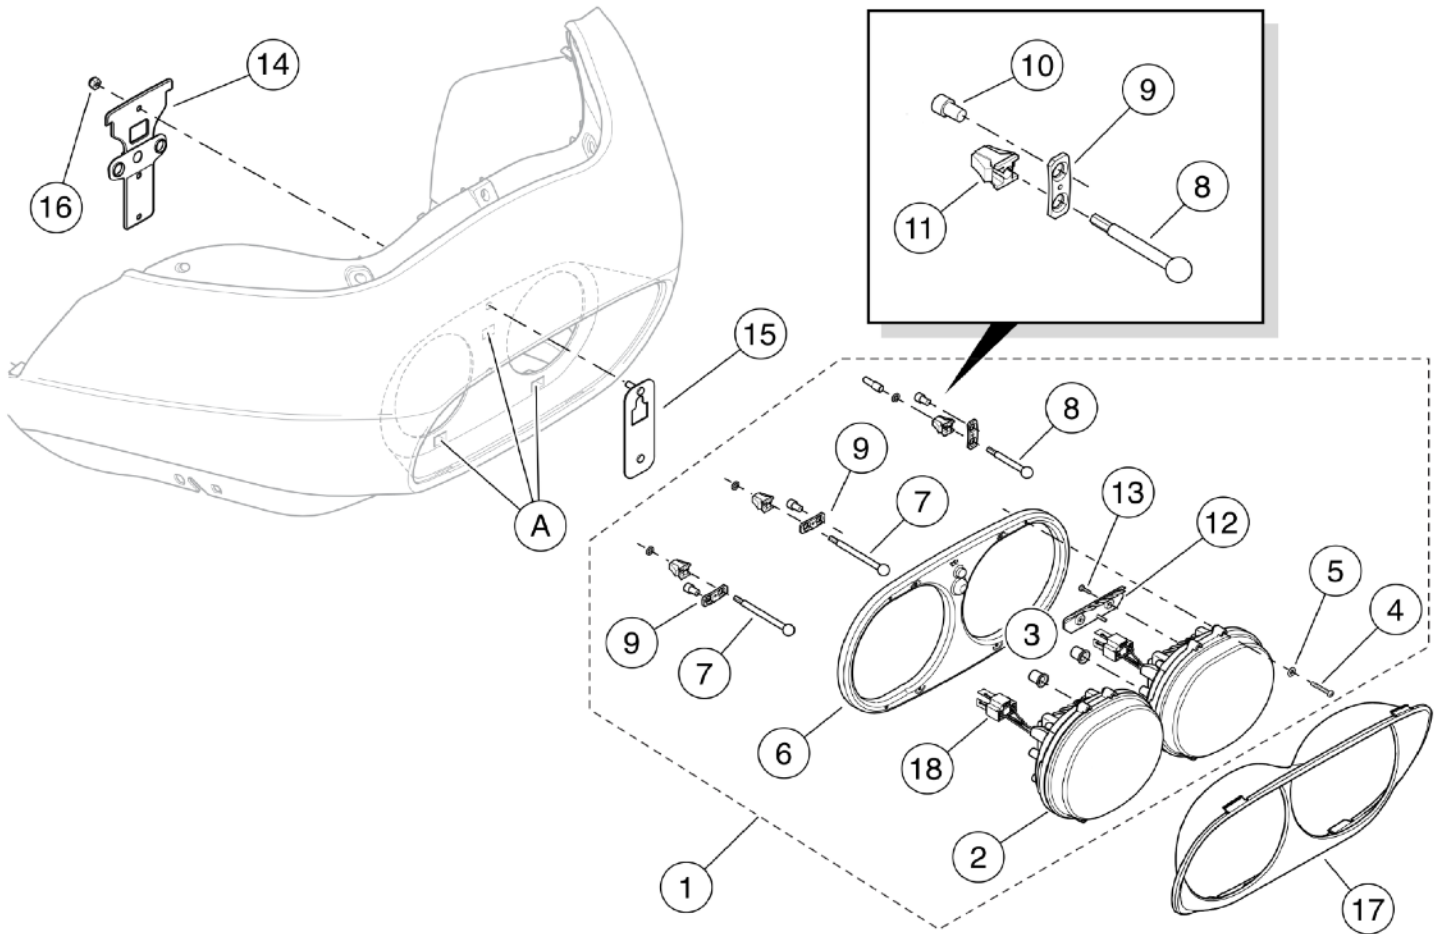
Headlight Assembly & Parts - RRI Blazemaker Road Glide LED Headlight Kit
